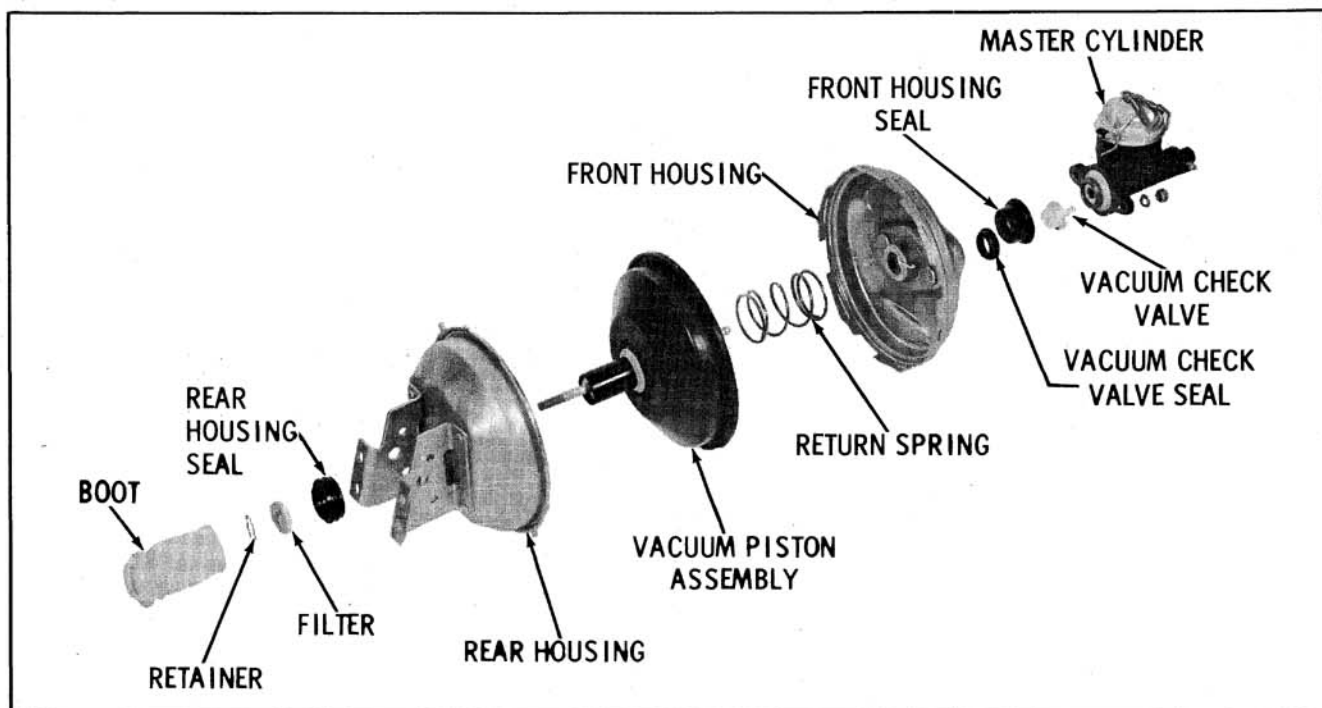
Moraine Brake Assembly (33 through 38 Series)
